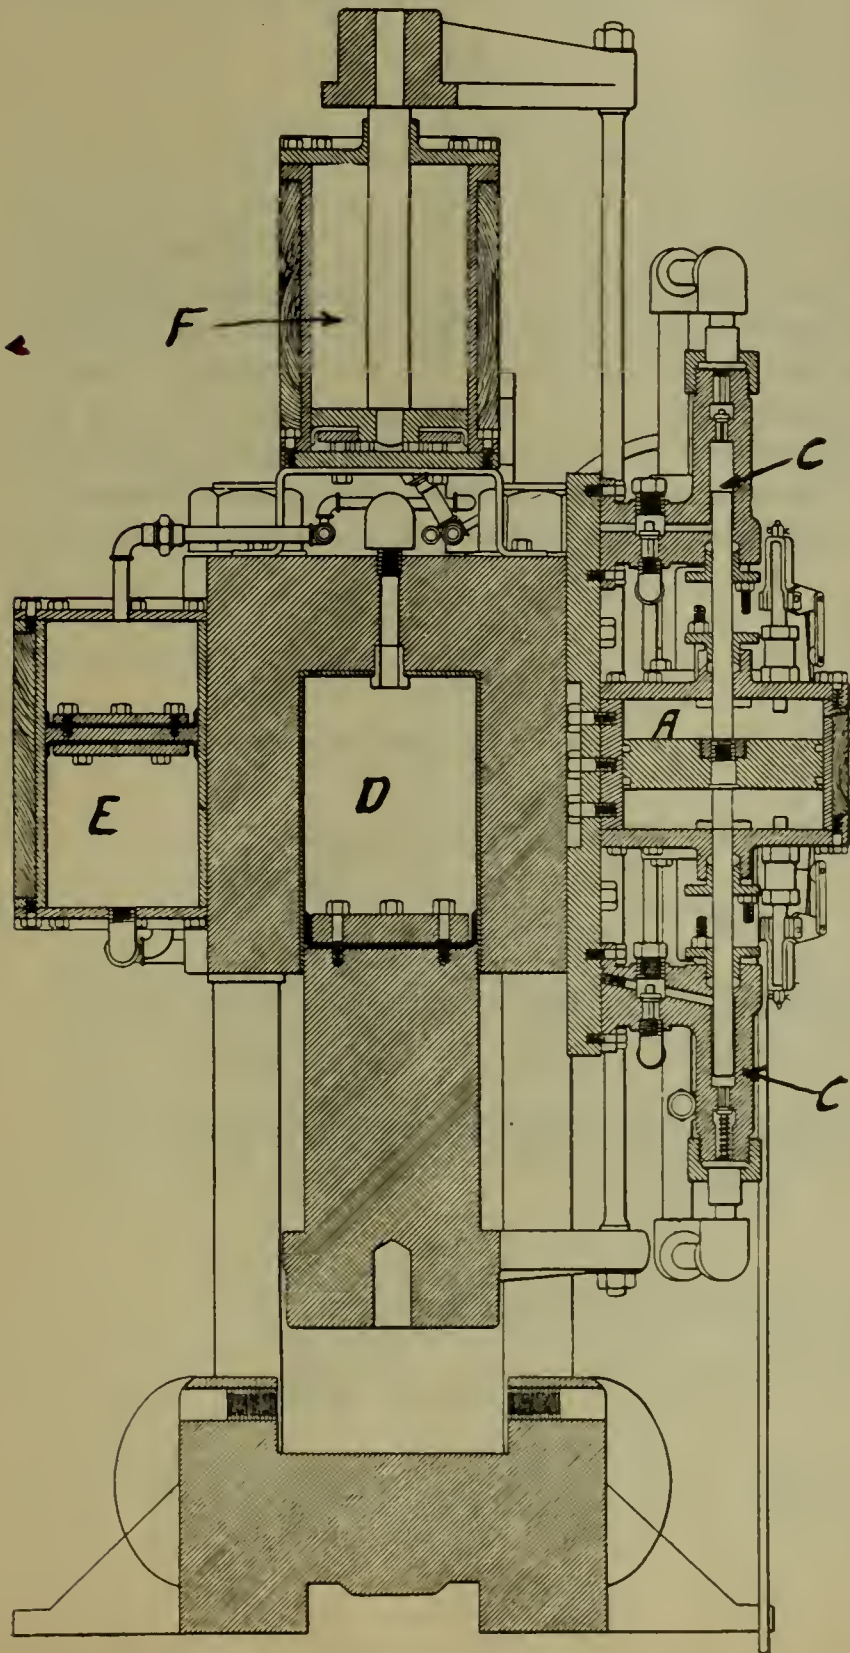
SEC. OF HYDRAULIC SHEAR FOR COUPLER RIVETS.—L. S. & M. S. RY.
